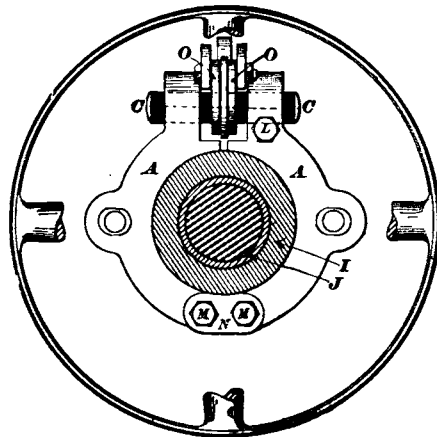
WOODCOCK PULLEY CLUTCH AND CUT-OFF COUPLING.
